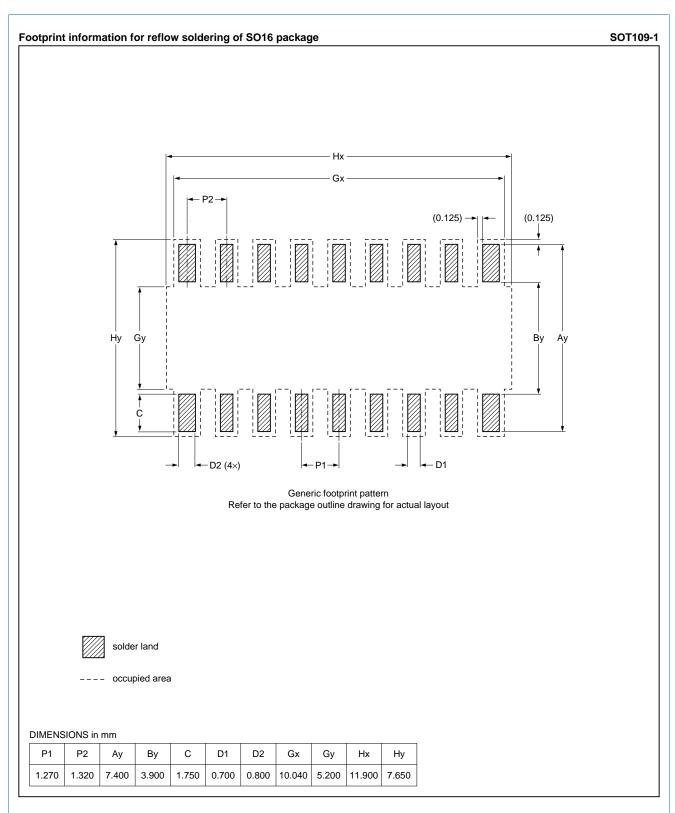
PCB footprint for SOT109-1 (SO16); reflow soldering
